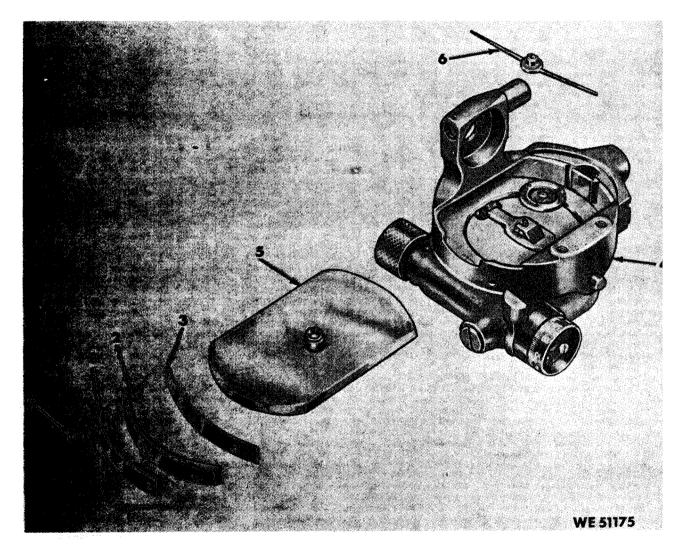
Magnetic needle, body assembly and associated parts—exploded view.
